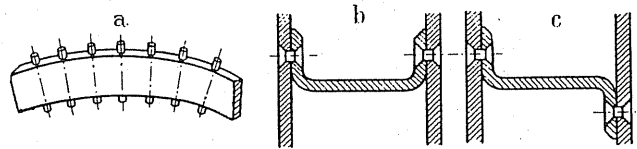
(a) Blade with fixed rivets. (b) and (c) Typical riveting layout.
